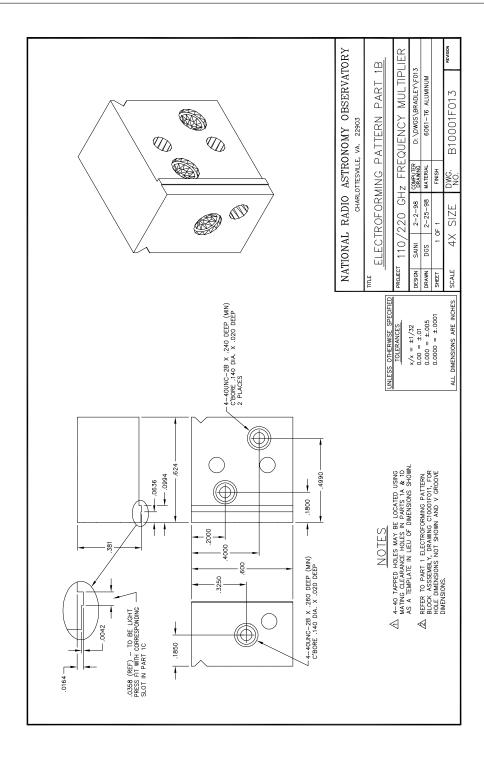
110/220 GHz frequency doubler: Mechanical details of the mandrel
